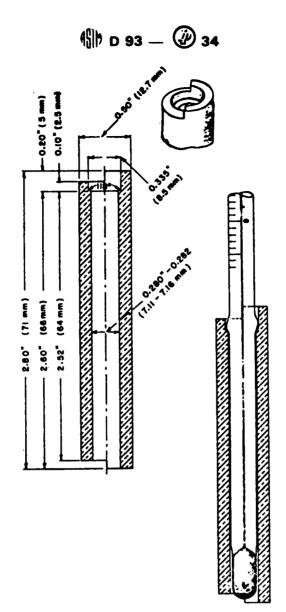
Test Gage for Checking Enlargements on Thermometers.
